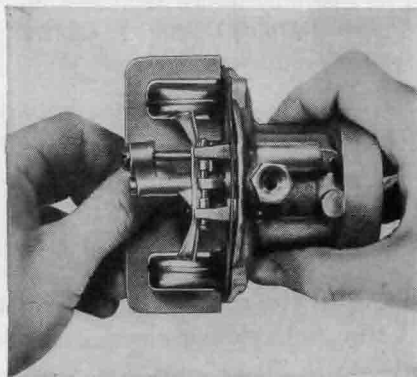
Checking centering of floats. (Chevrolet Motor Division of General Motors Corporation)
